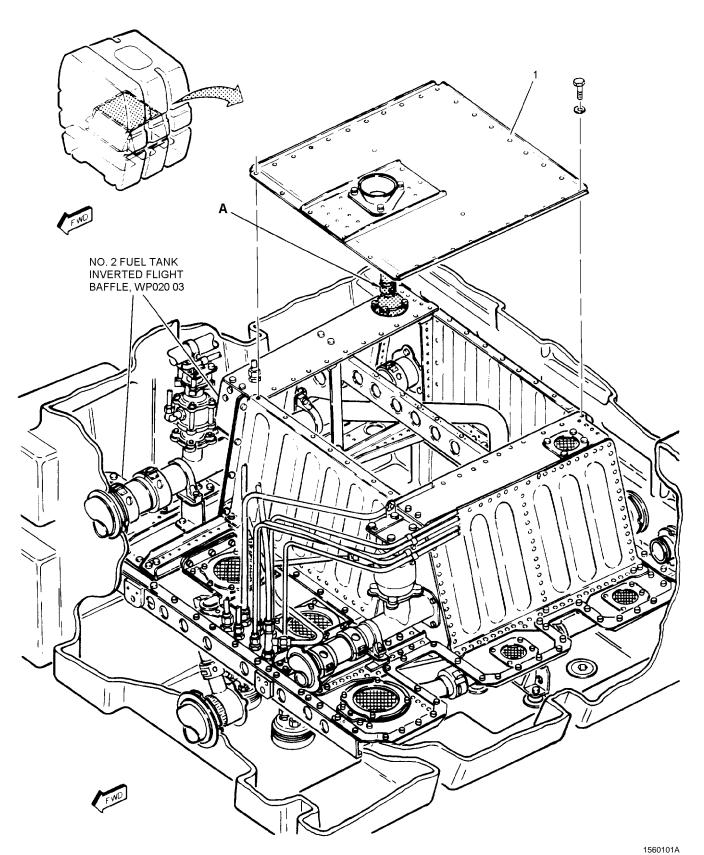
No. 2 Fuel Tank Inverted Flight Vent Check Valve (5VAR677) (Sheet 1)
